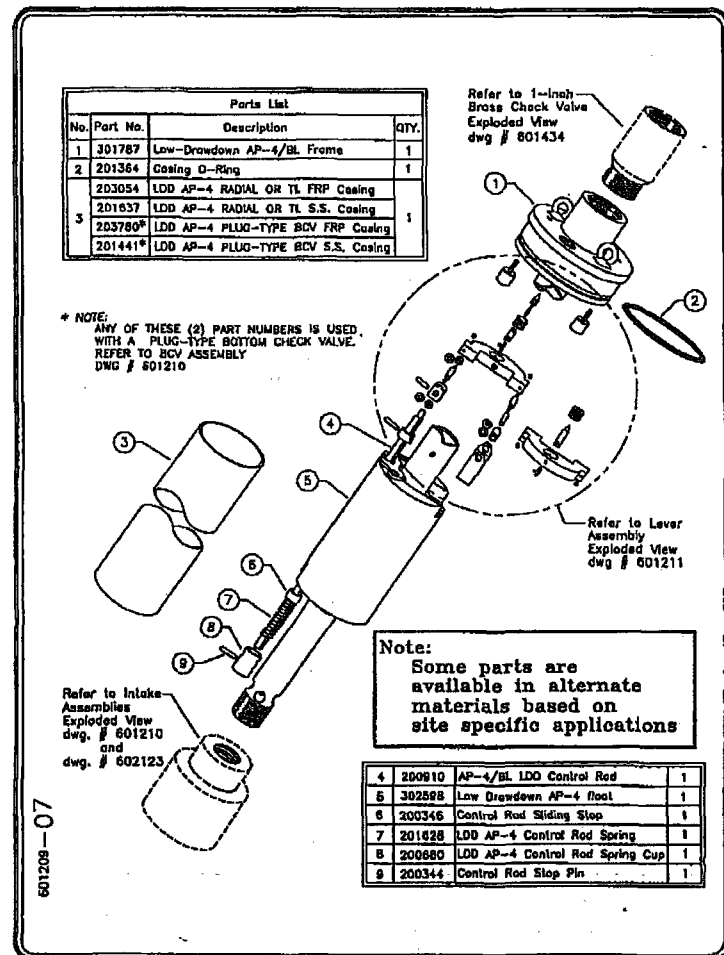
Exploded View of LDD Bottom-Loading AutoPump AP-4
